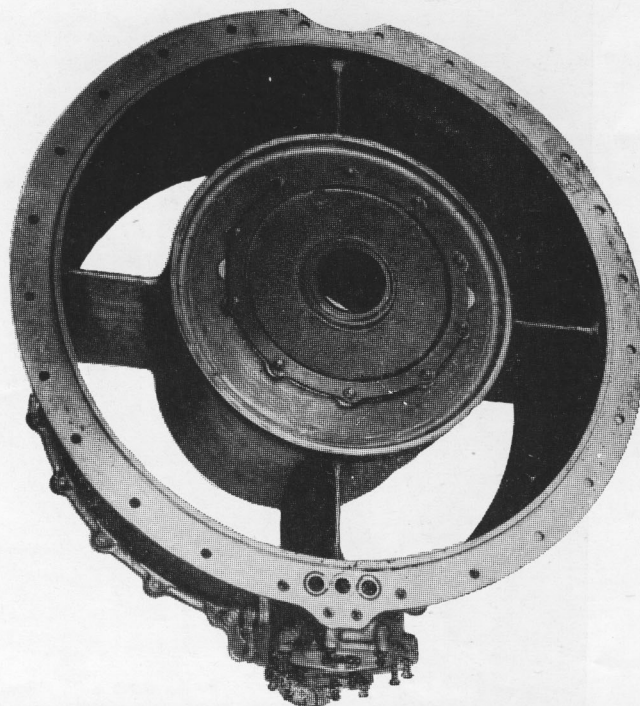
Aft face of the intake casting with the front compressor bearing held in place by a round plate attached to ten studs. The boltholes in the outer flange are for attachment to the compressor stator casting.
